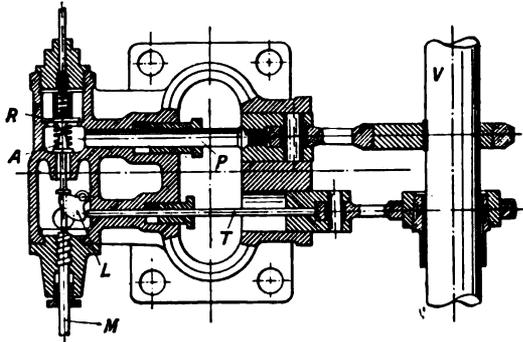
Section through Fuel Pump, showing automatic Governing Device (Diesel Engine).
